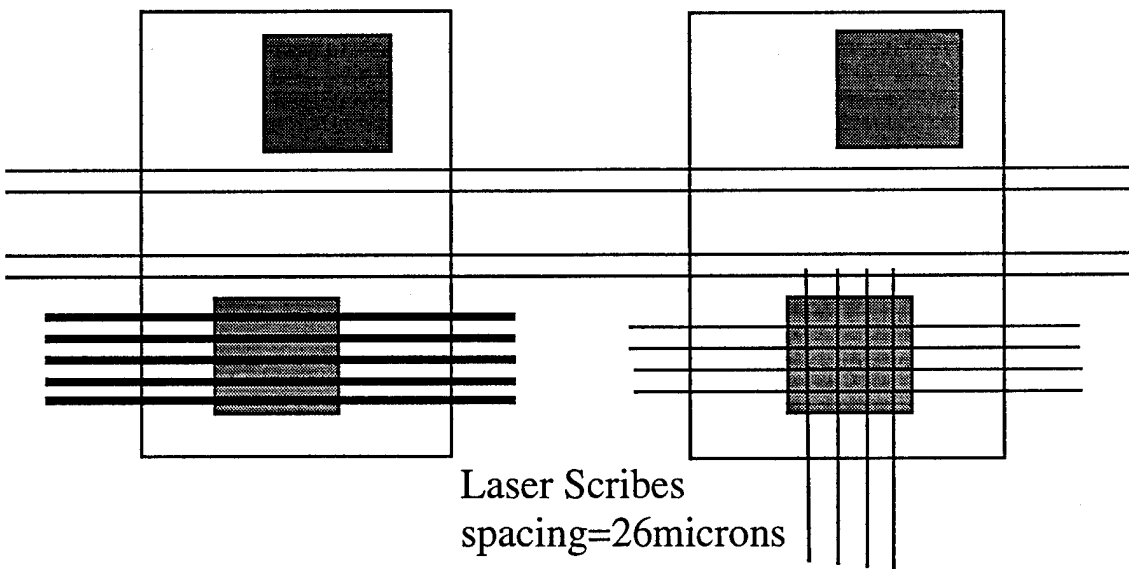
SiC JFET as seen through the substrate with laser weld patterns used to attach die in several experiment. Single stripes showed the best results.
